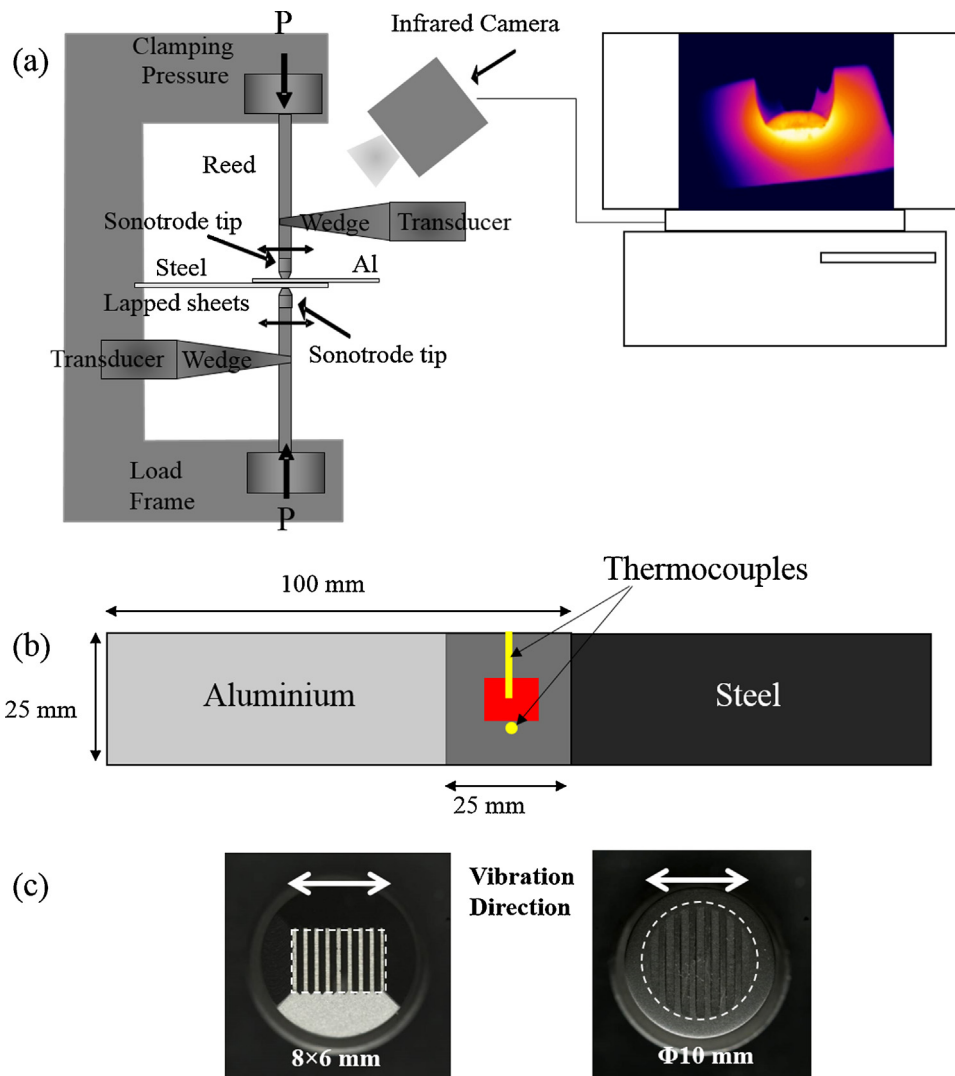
(a) A schematic illustration of the welding setup showing the components of the MH2016 dual head ultrasonic spot welder and the integrated thermal camera, (b) the weld sample geometry showing the positions of the two thermocouples for temperature measurements close to the sonotrode tip edge and weld centre, (c) image of the flat (left) and dome-shaped (right) sonotrode welding tips.
